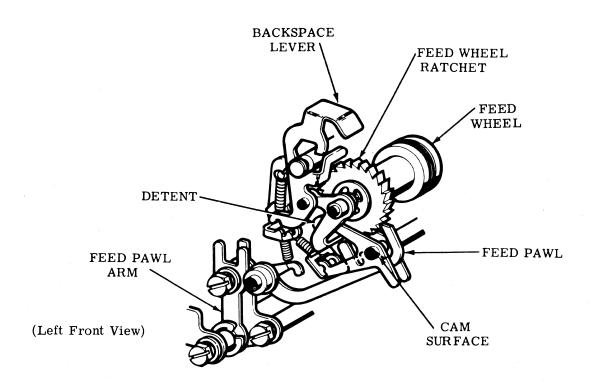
Feed Wheel Mechanism (Tape Feed Mechanism)
